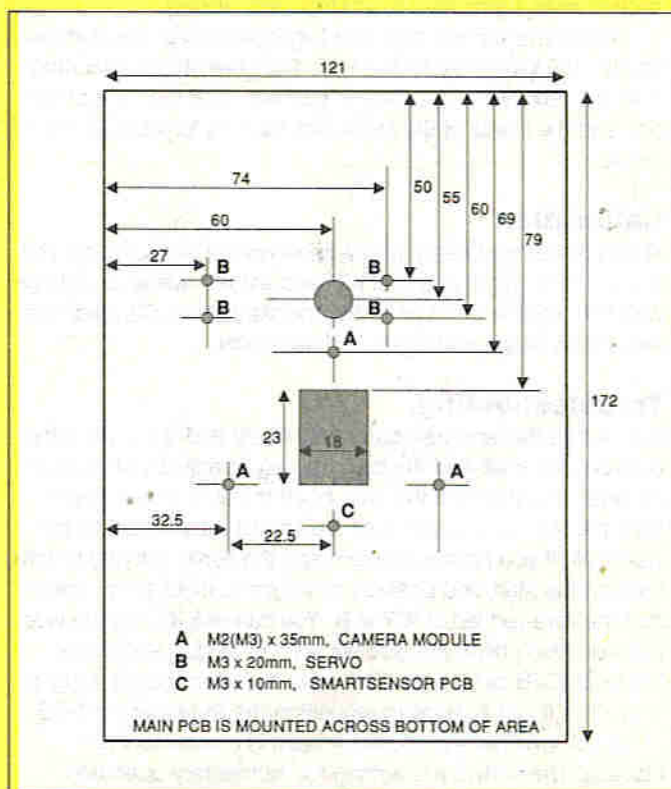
a dimensional diagram showing the relative positions of the PCBs, servo motor and camera module used in the prototype
